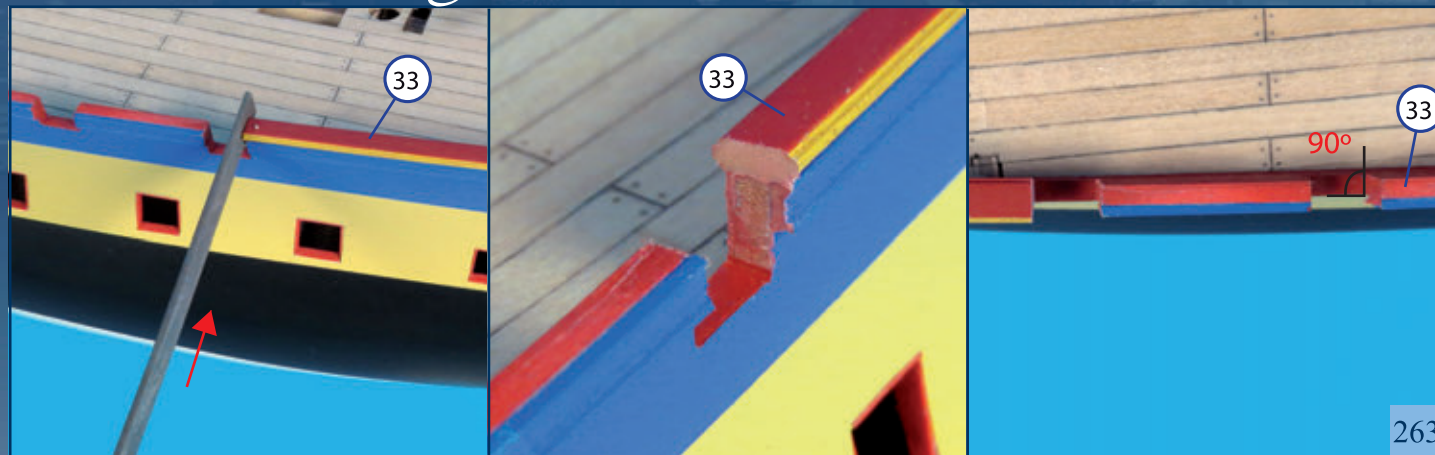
, 262. Mark and cut two parts of moulding 33 and place them on the stern section; cut them a little longer than needed. The edge painted yellow must be on the outside of the hull. Center the moulding on the box section.
